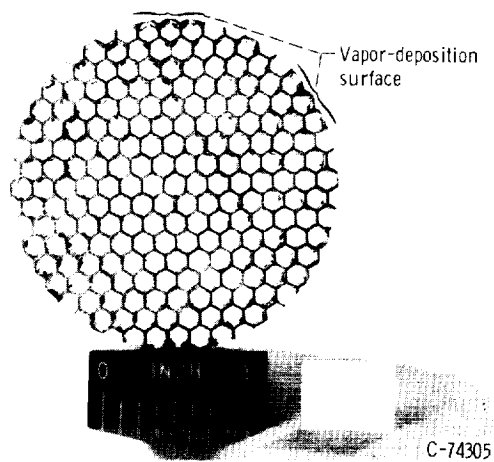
Honeycomb fuel stage used for direct vapor-deposition attachment.
